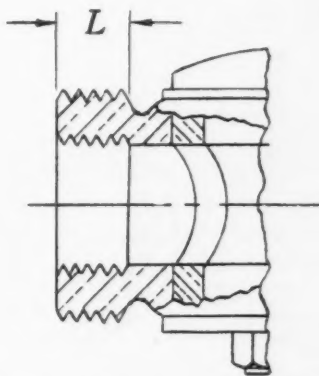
Fitting Thread for Use With Extra Strong Lead Flanged Pipe
